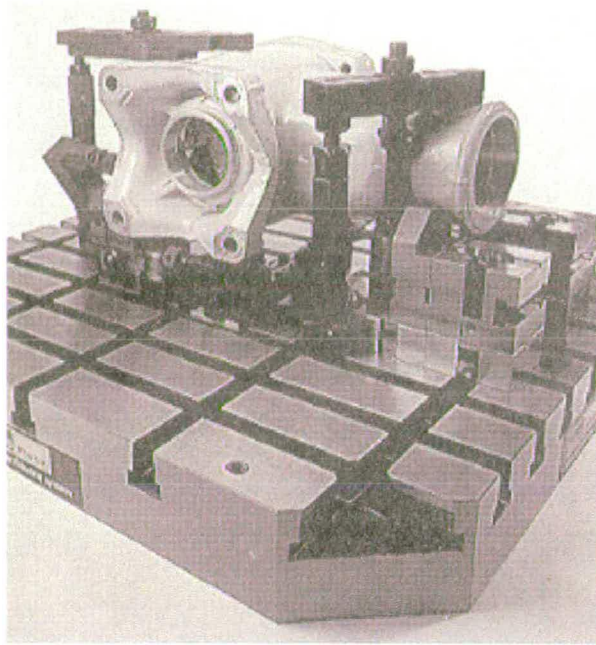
Typical modular fixture assembly (courtesy of WDS).
